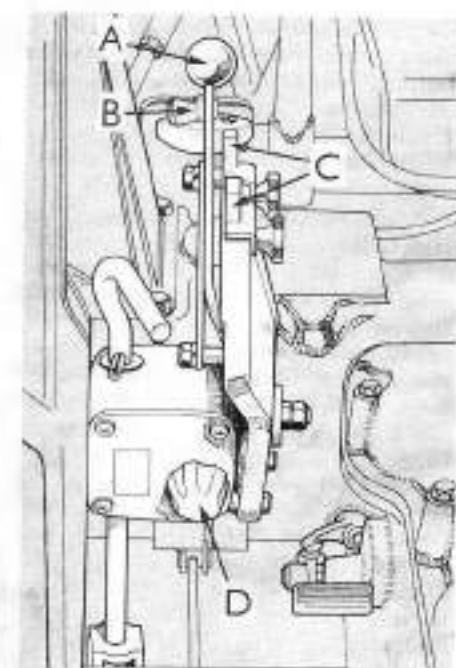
Drawing showing hydraulic system controls. Refer also to Fig. 269 and 270.
